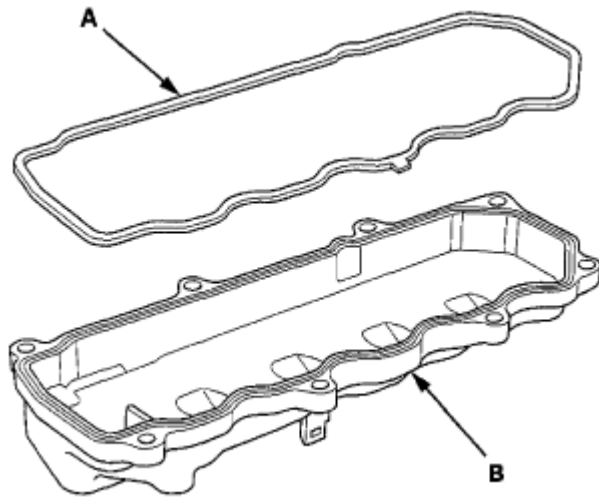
Locating Head Cover Gasket And Groove Of Cylinder Head Cover
